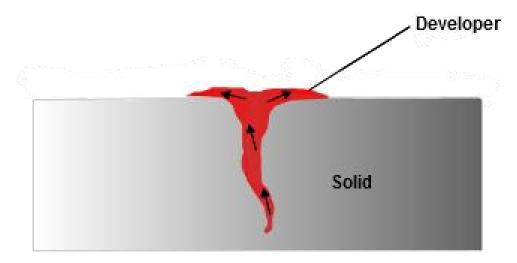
Representation liquid penetrant inspection technique
